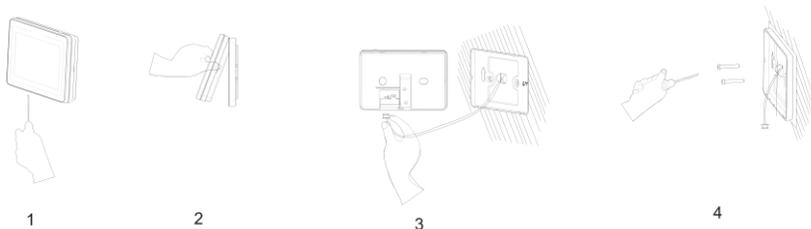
Sketch Map for Disassembly of Wired Controller
